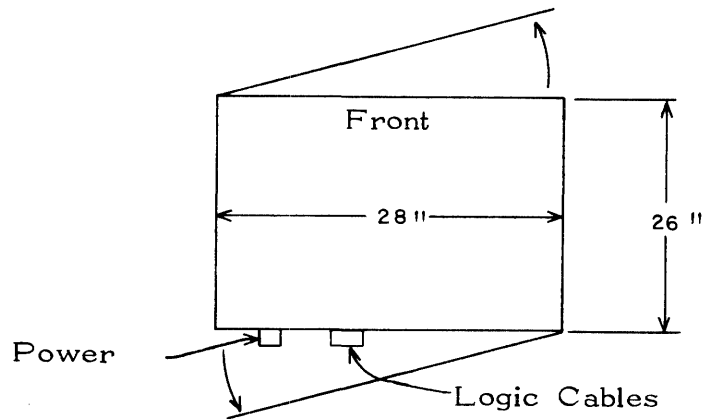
Physical Dimensions, 8092 TeleProgrammer)
